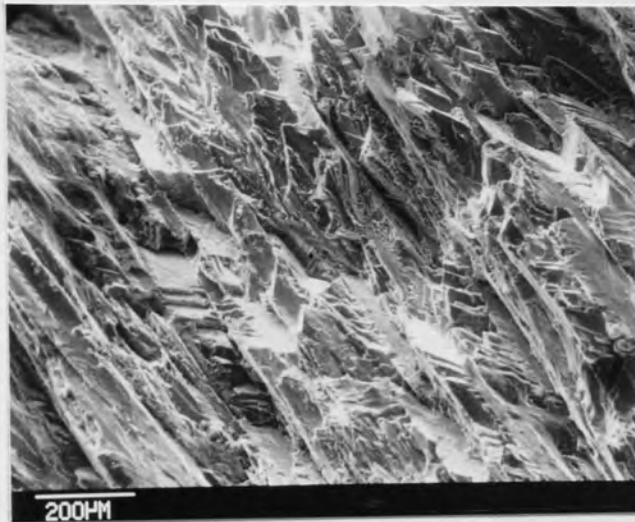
Dimpling in a 2014-T6 fast fracture surface.
